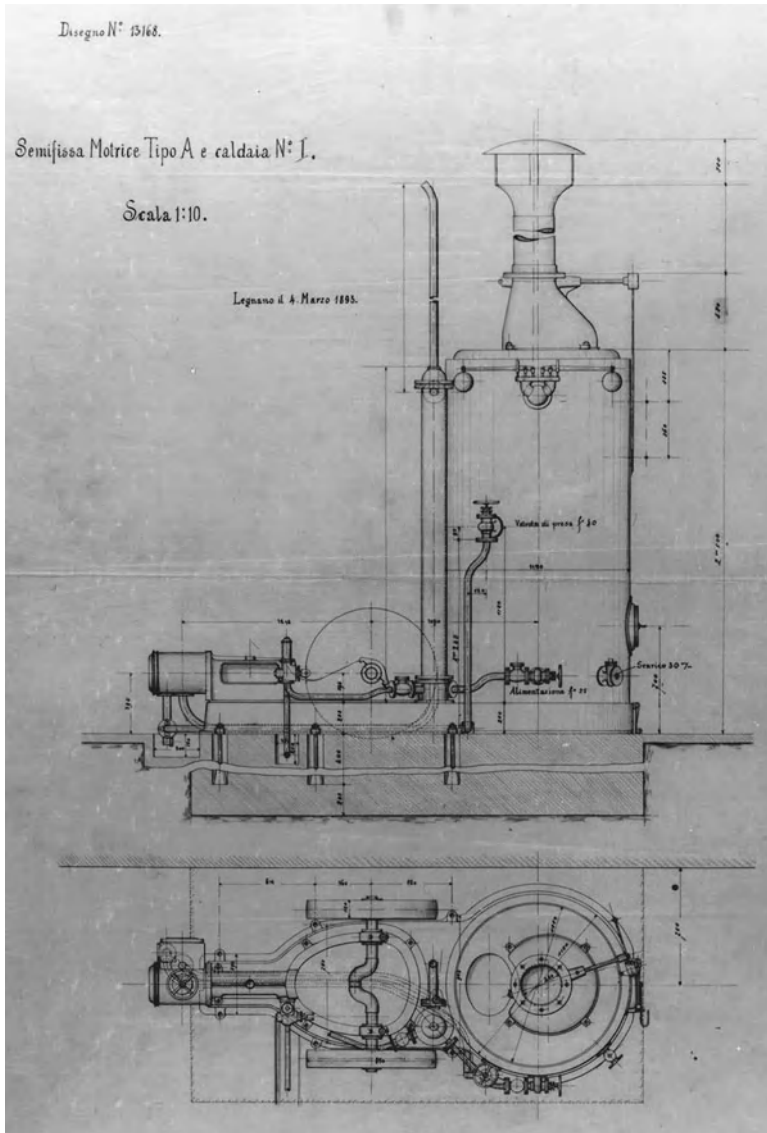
Steam machine (by Franco Tosi 1893)
